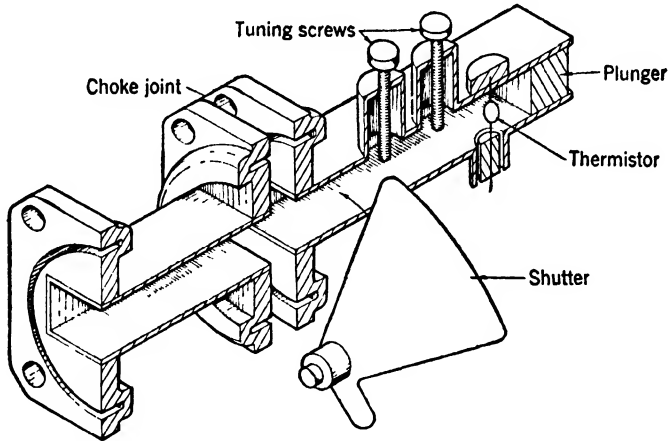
Thermistor mount and gate for 3-cm measurements.
